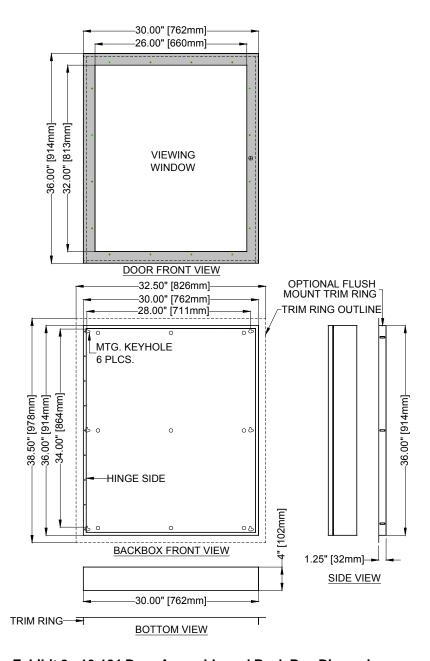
10-124 Door Assembly and Back Box Dimensions
